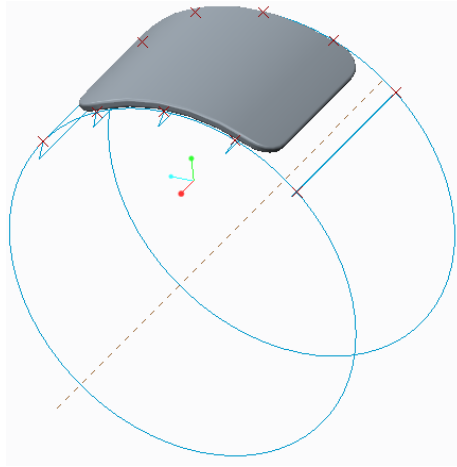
Cylindrical Inman implant surface design after trimming and rounding.
